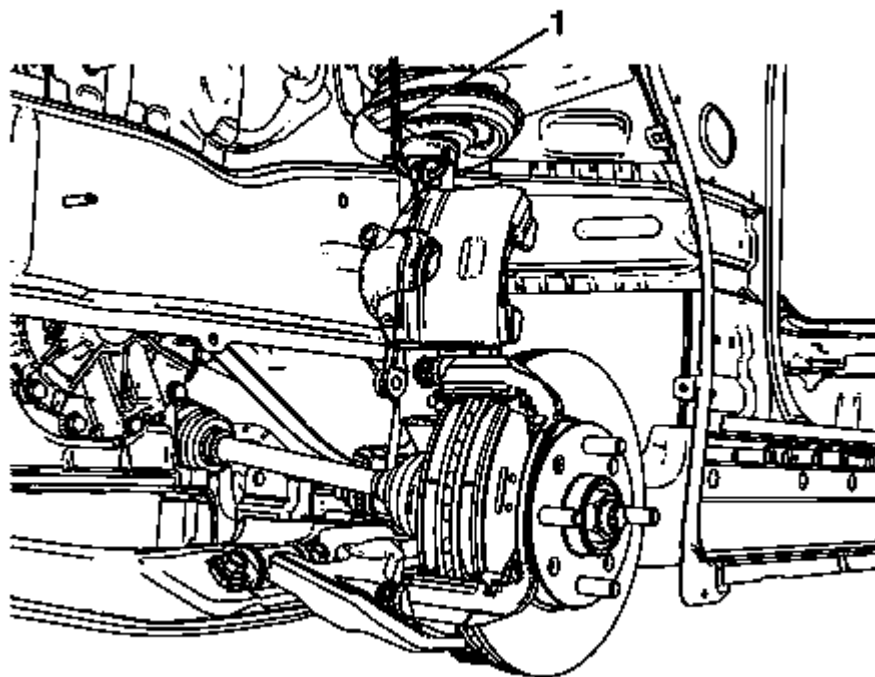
Brake Caliper With Heavy Mechanic's Wire
